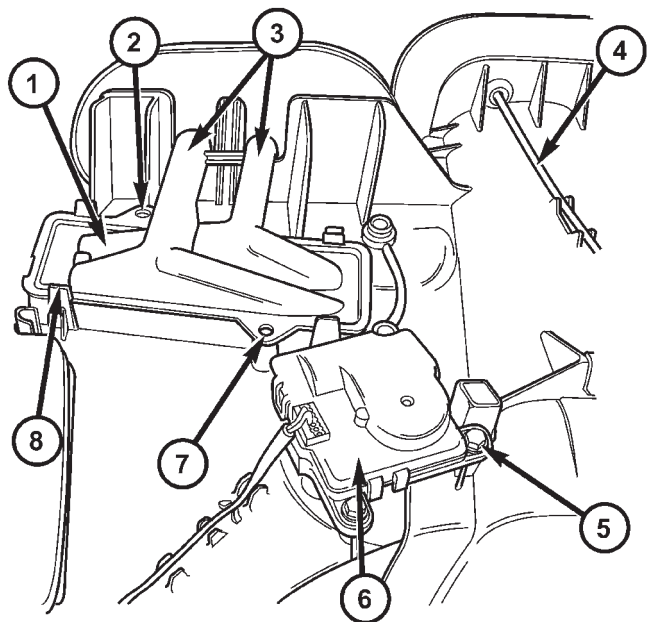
HEATER CORE REMOVAL/INSTALLATION
